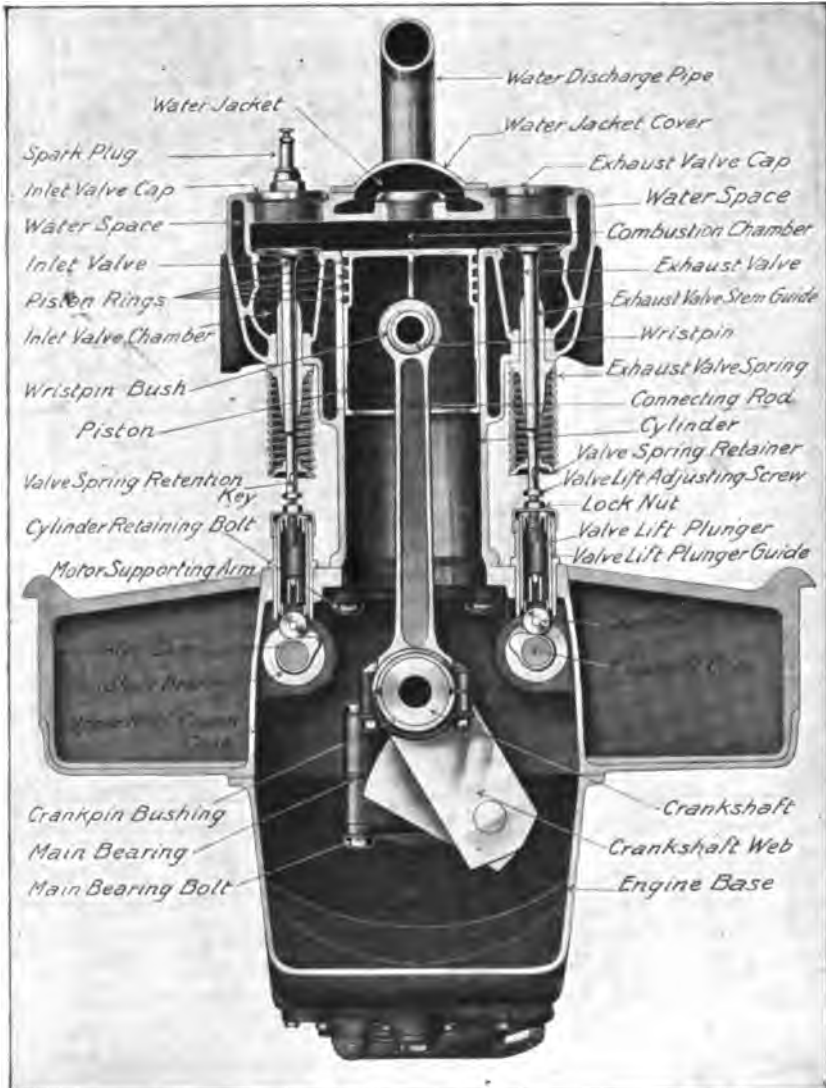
End sectional view of typical internal combustion motor of the T head type, showing valve operating mechanism.
